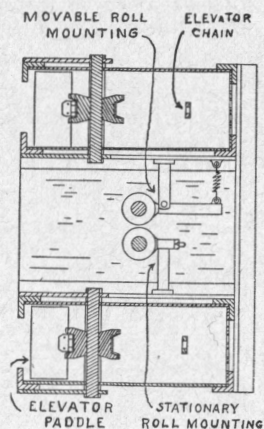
Cross-section of Texas Station Cotton Harvester, showing rear or upper bearings for both the movable and stationary stripping roll.
